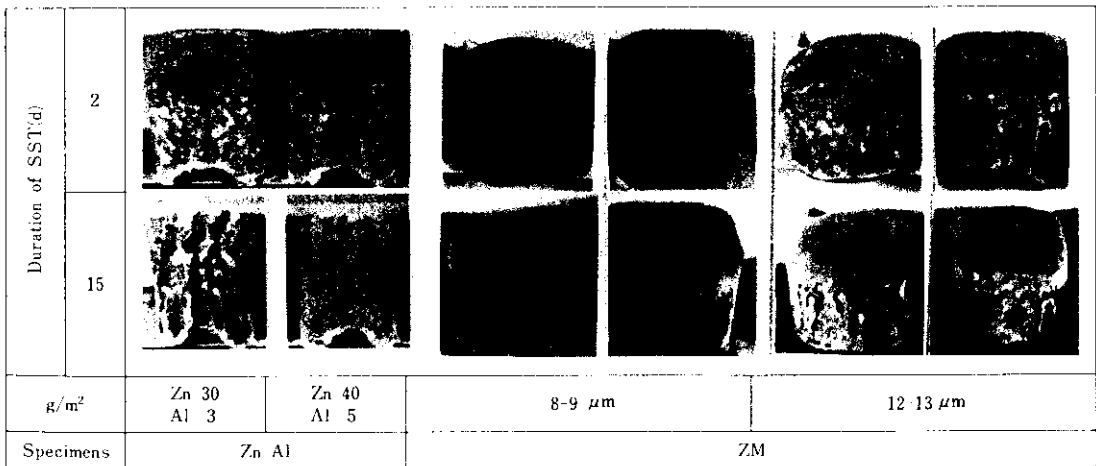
Appearances of deep-drawn specimens after the salt spray test (SST)
